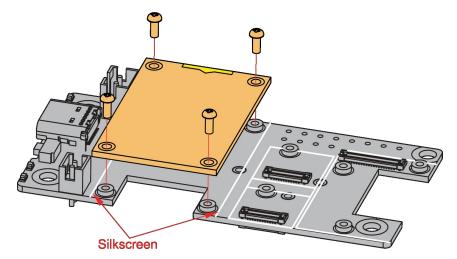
WisBlock Core silkscreen on the RAK19007 Base Board
